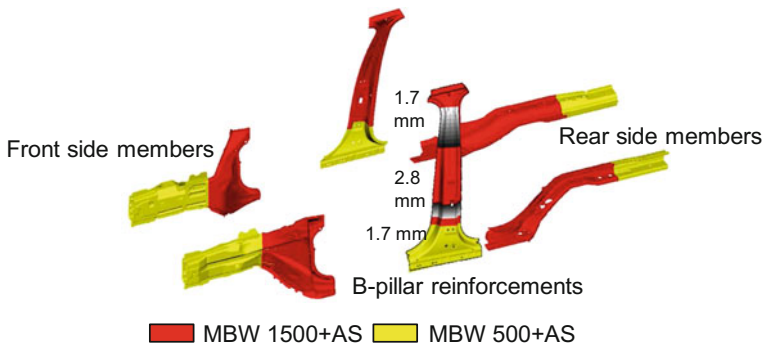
Hot stamped tailor welded blanks in 2014 Volvo XC90 (re-created after [33, 34])
